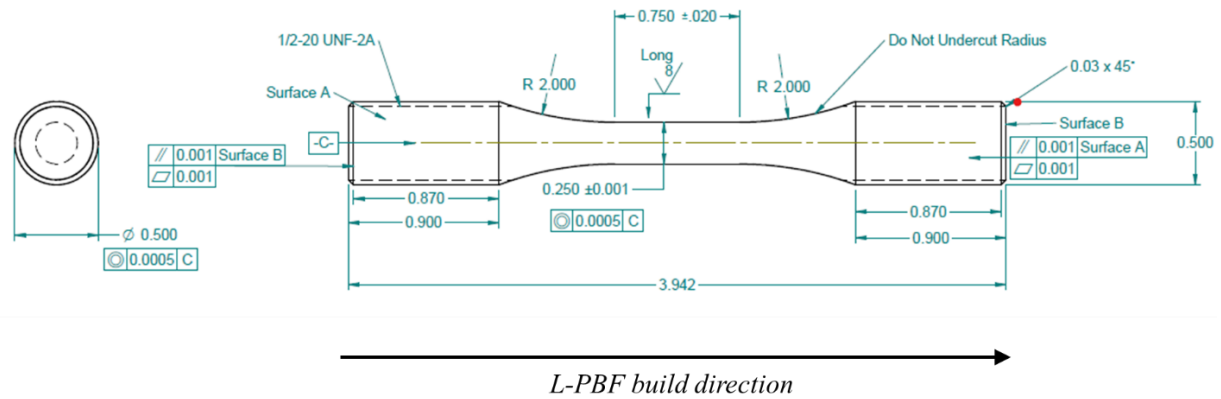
Geometry of the smooth specimen used for HCF testing in ambient air. All dimensions are in inches. The reduced section (C) was finish-machined to final diameter by turning.
